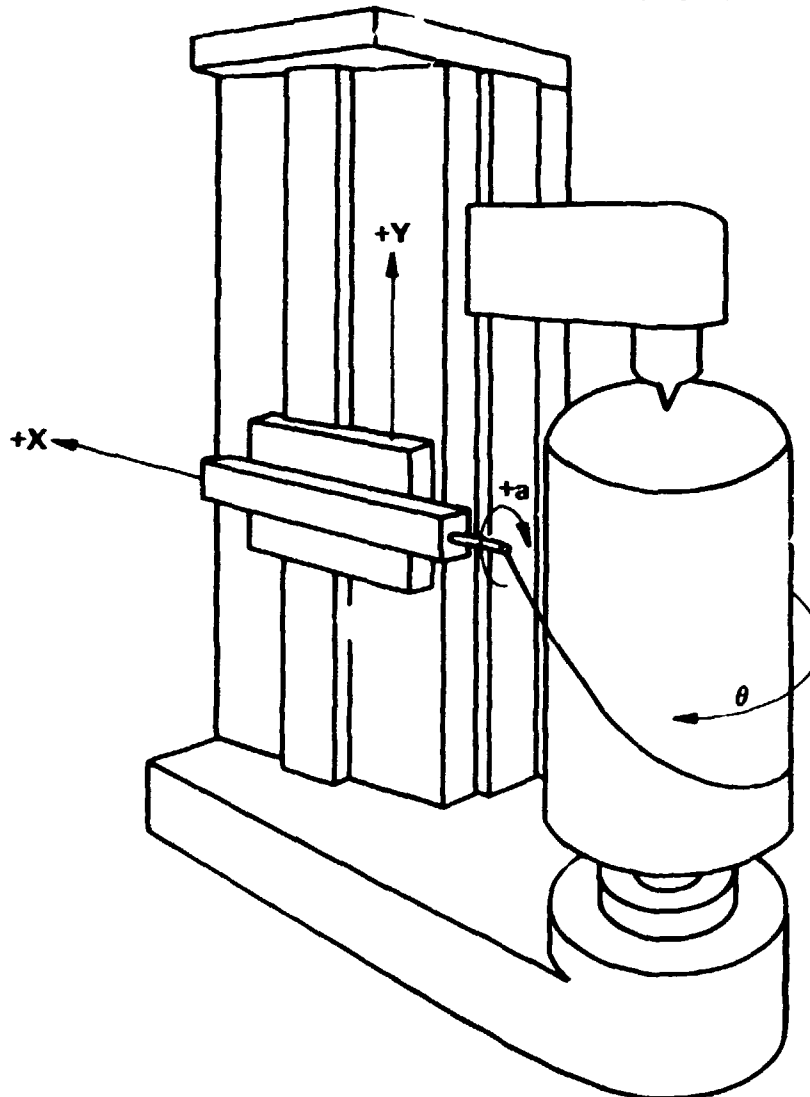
Schematic layout of Black-Clawson winding machine.
